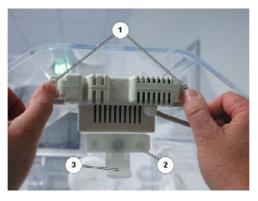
Rear view of sensor module: locking tabs and sensor module lock plate
